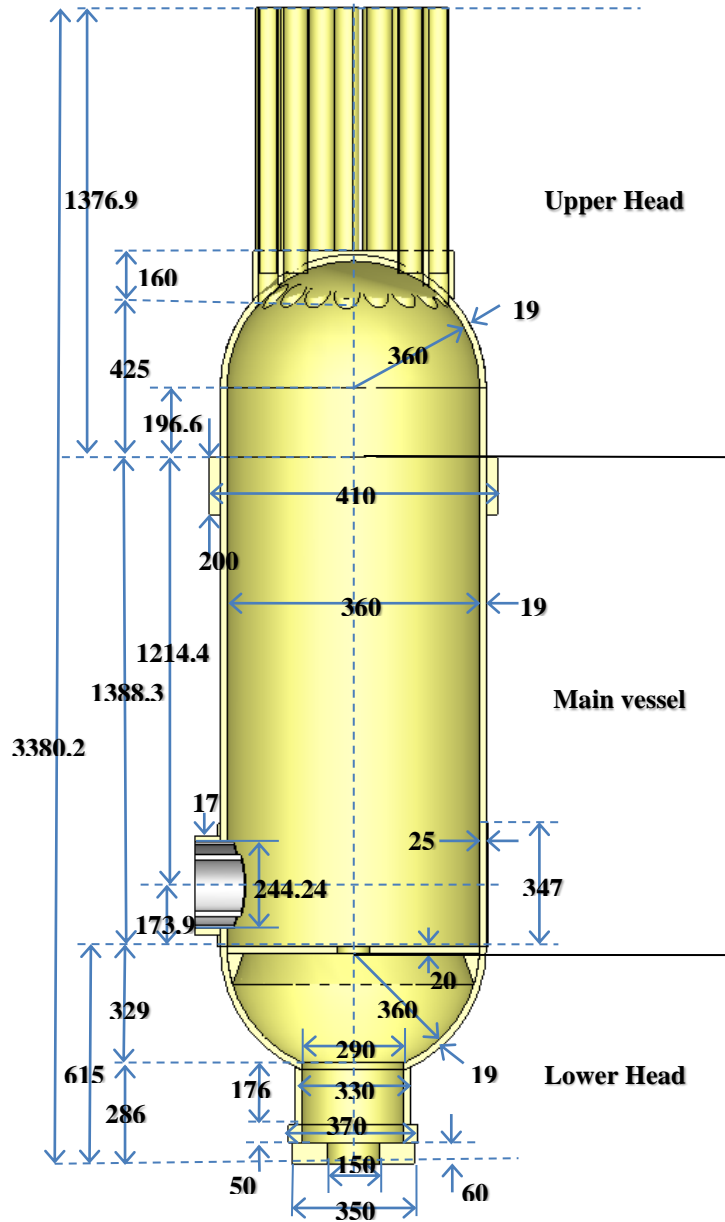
Dimensions for the RPV showing the three separate sections. (all units are given in cm)
